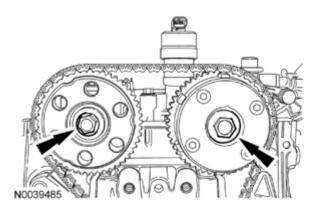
Locating Camshaft Bolts Courtesy of FORD MOTOR CO.
